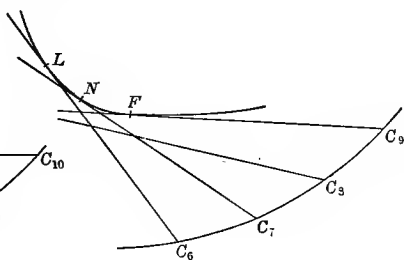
IMPOSSIBLE CASE FOR STRAIGHT EDGE FOLLOWER WITH SLIDING CONTACT
